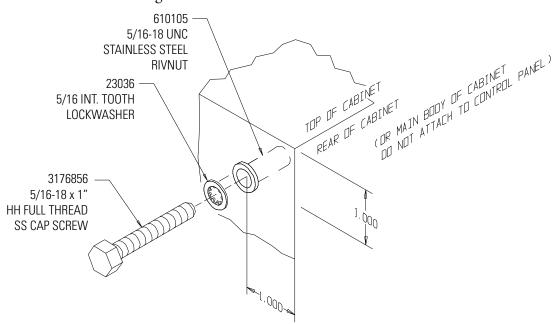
Typical Wall Anchor Installation for Both Sides
